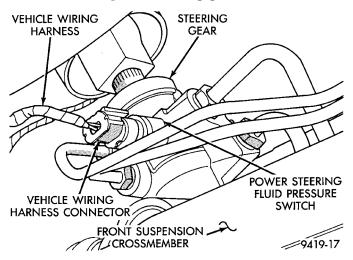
Power Steering Pressure Switch Location On Steering Gear
